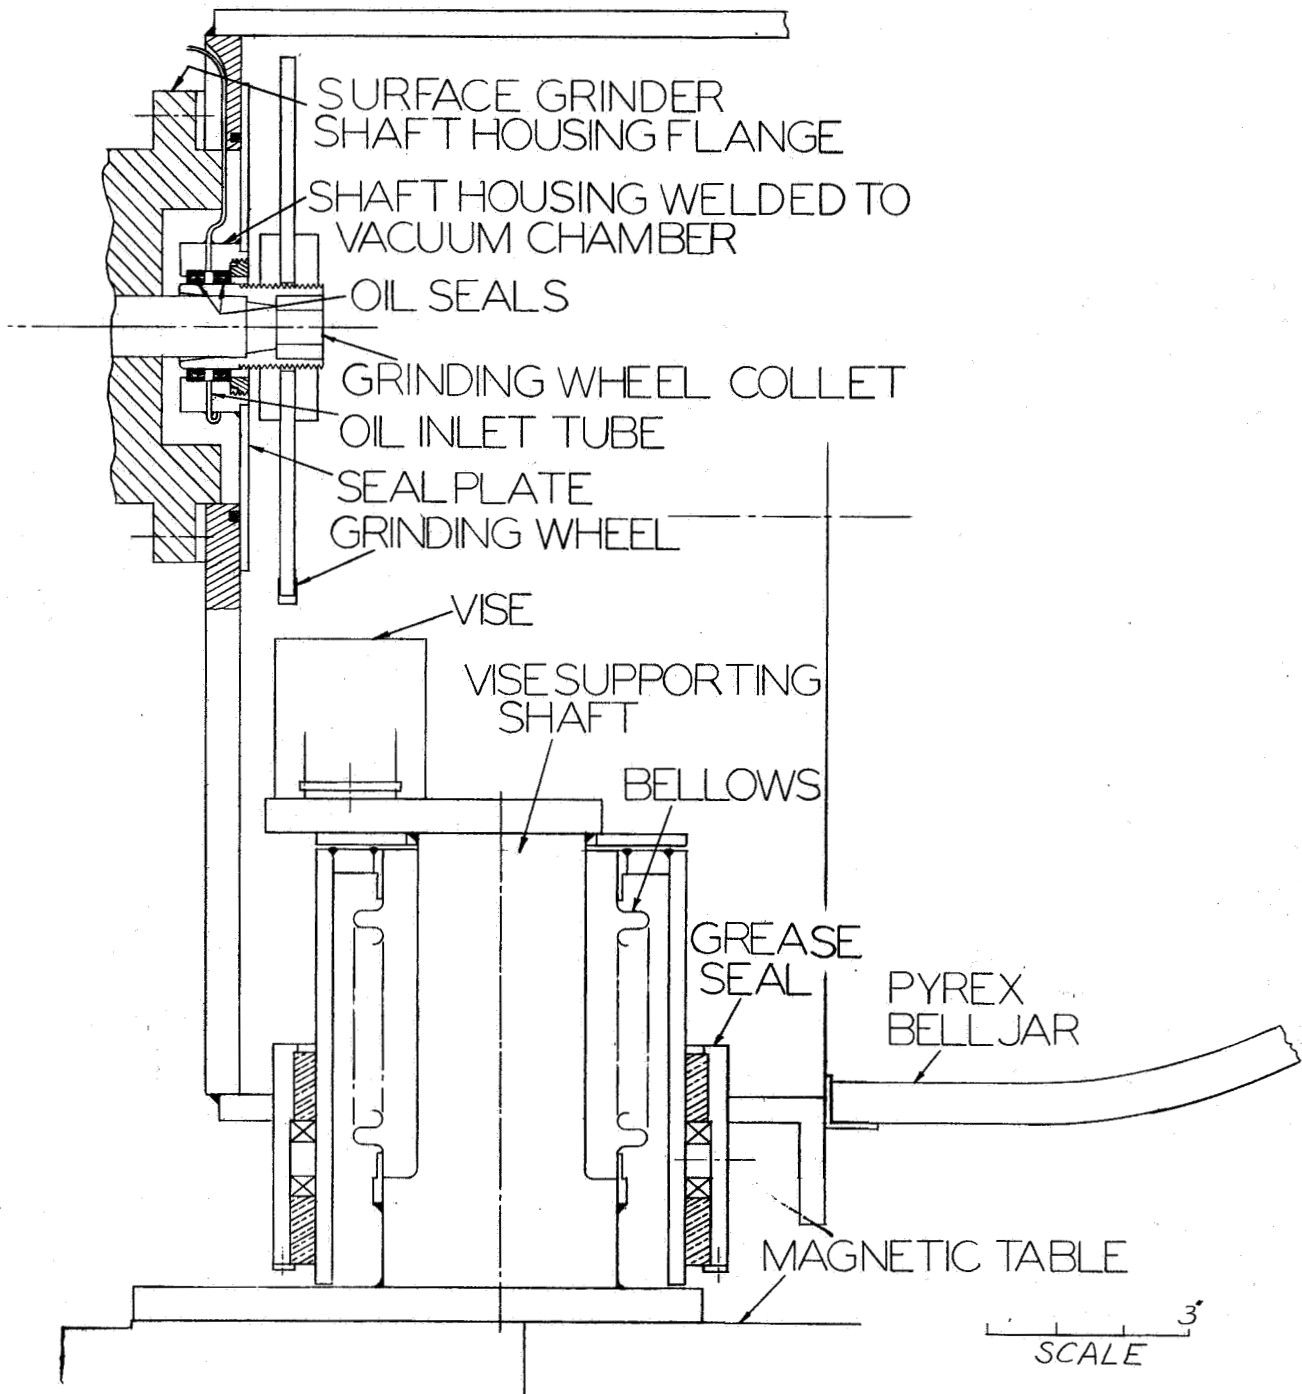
SIDE VIEW OF VACUUM CHAMBER
